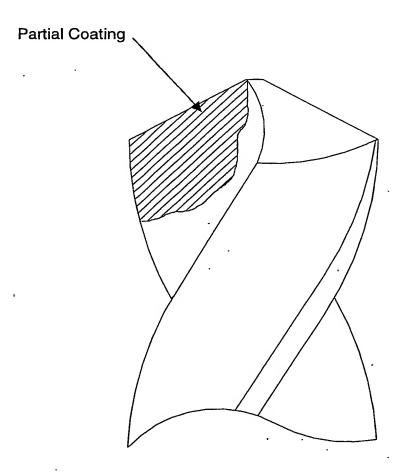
A partially coated drill tool. The coating is applied only to the rake face.
